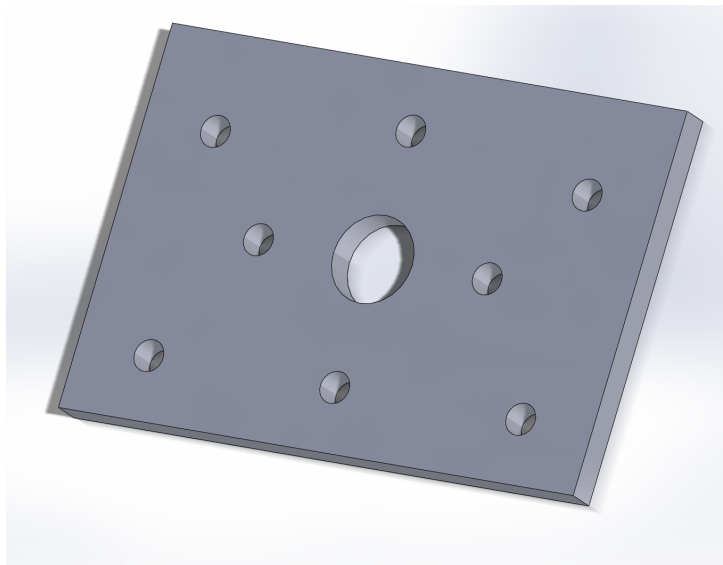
Connector plate model that connects the winch assembly and motor enclosure box together with holes in the middle to attach the motor.
